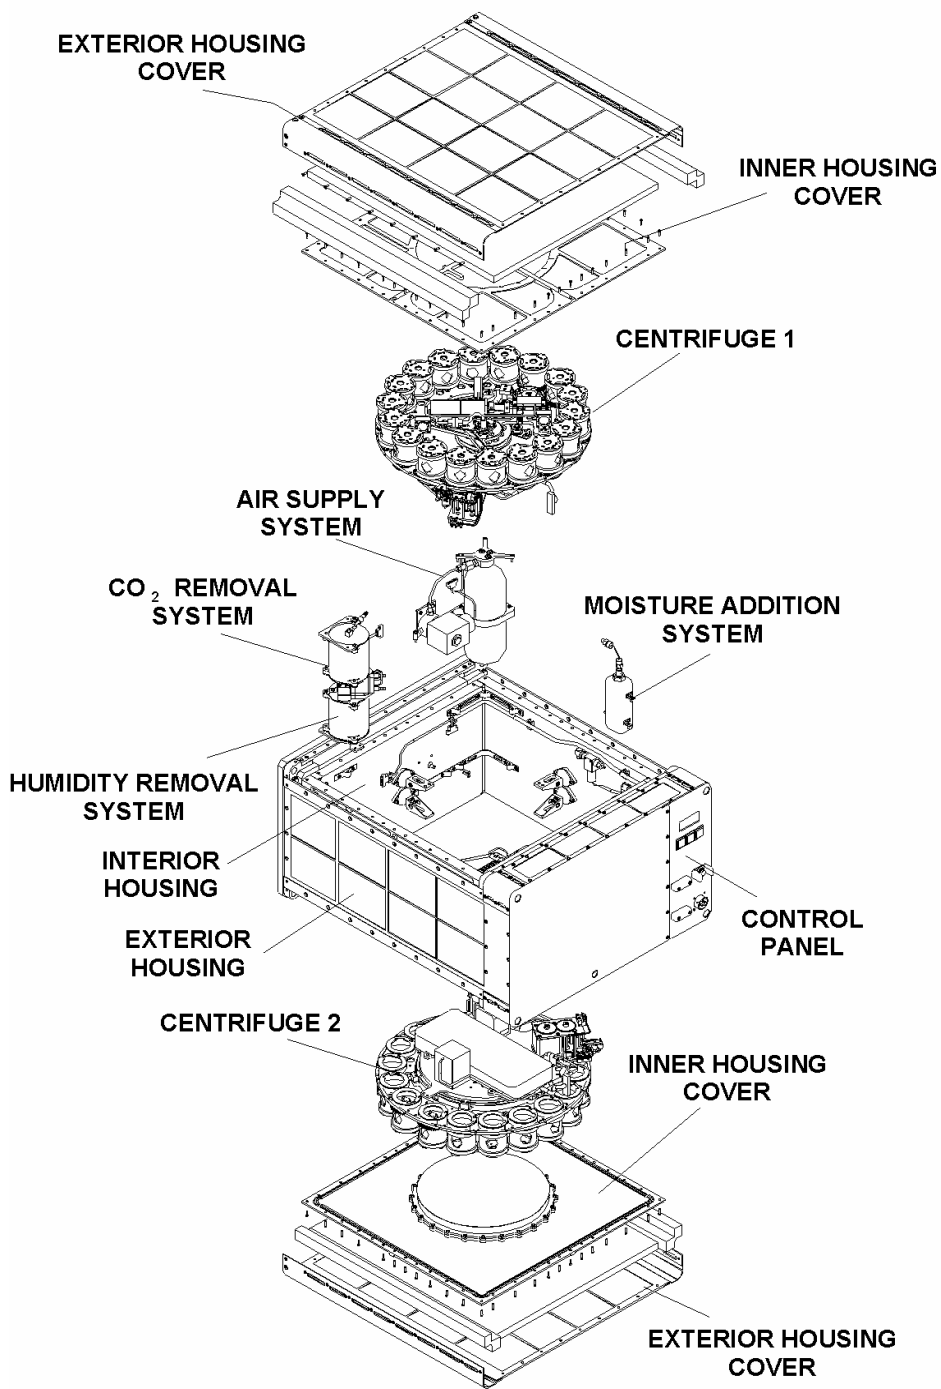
Exploded view of ADF showing upper and lower carousels, insulation and avionics layer, and internal mechanisms.
